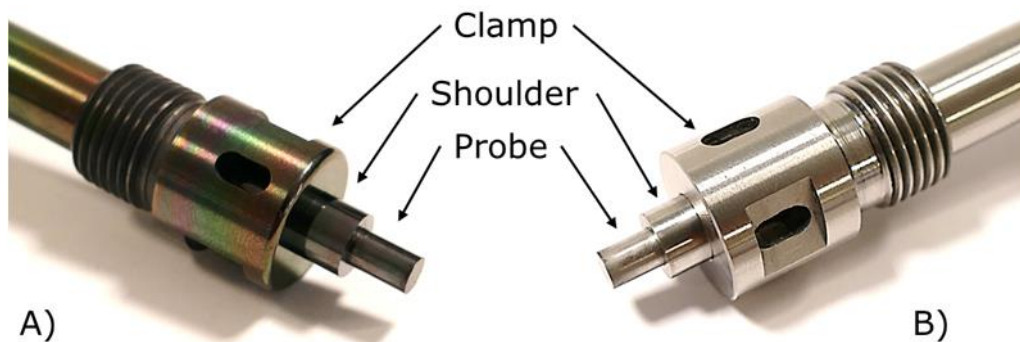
A) RFSSW tool components of Tool 1 and B) the RFSSW tool components of Tool 2 made from M42 high-speed steel.
